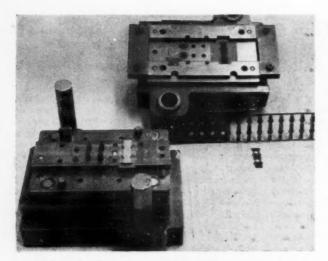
This press tool is used for blanking anodes from nickel iron strip and incorporates tungsten carbide punches and dies produced by spark-erosion. The tool will blank a complete batch before it requires to be re-serviced
